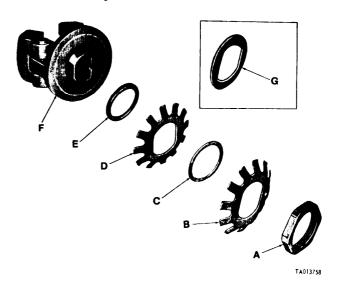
Disassembling or assembling friction drive spider and associated parts.
